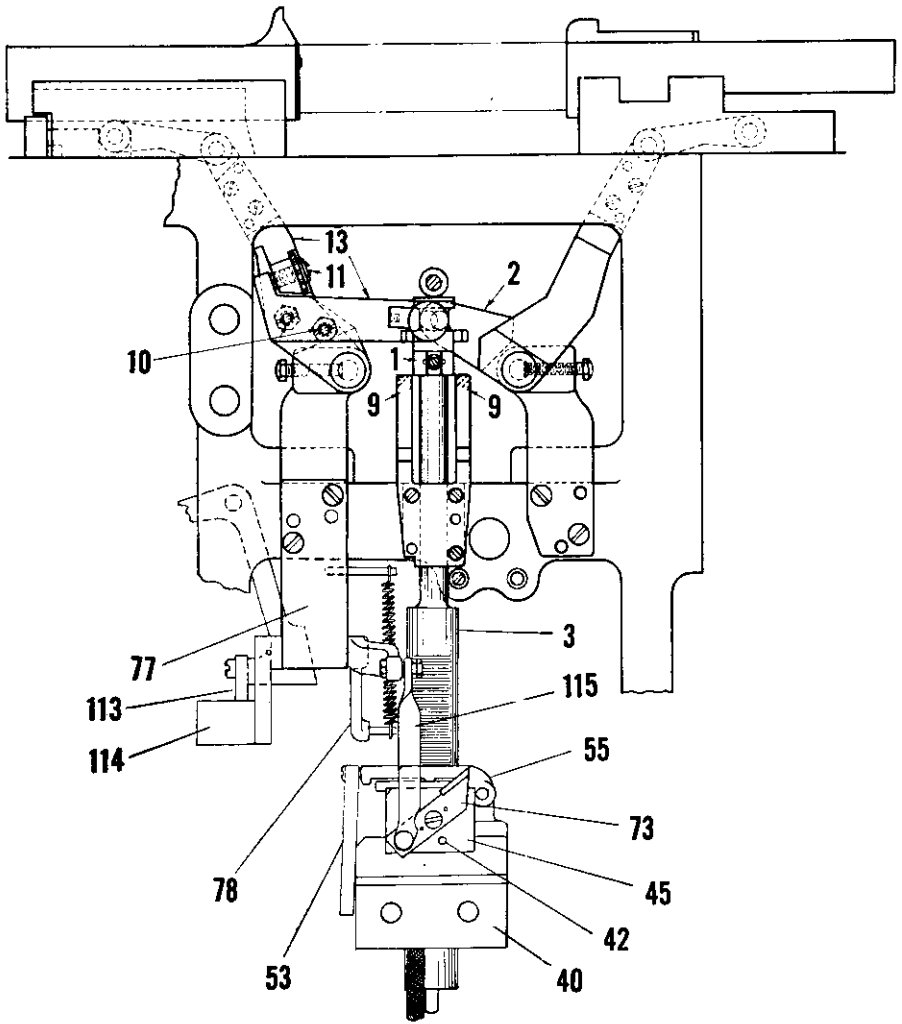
Front plan view of vise, control rod, latch and vise jaw operating levers.
